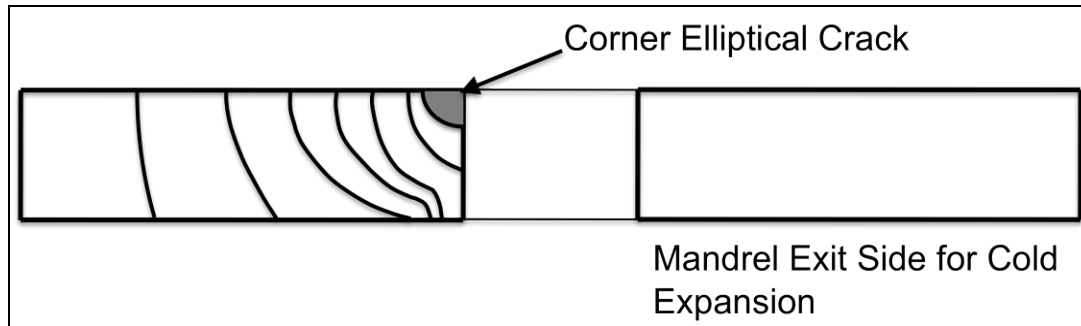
Fatigue crack growth geometry for cold expanded Al 2024-T351 specimens.
